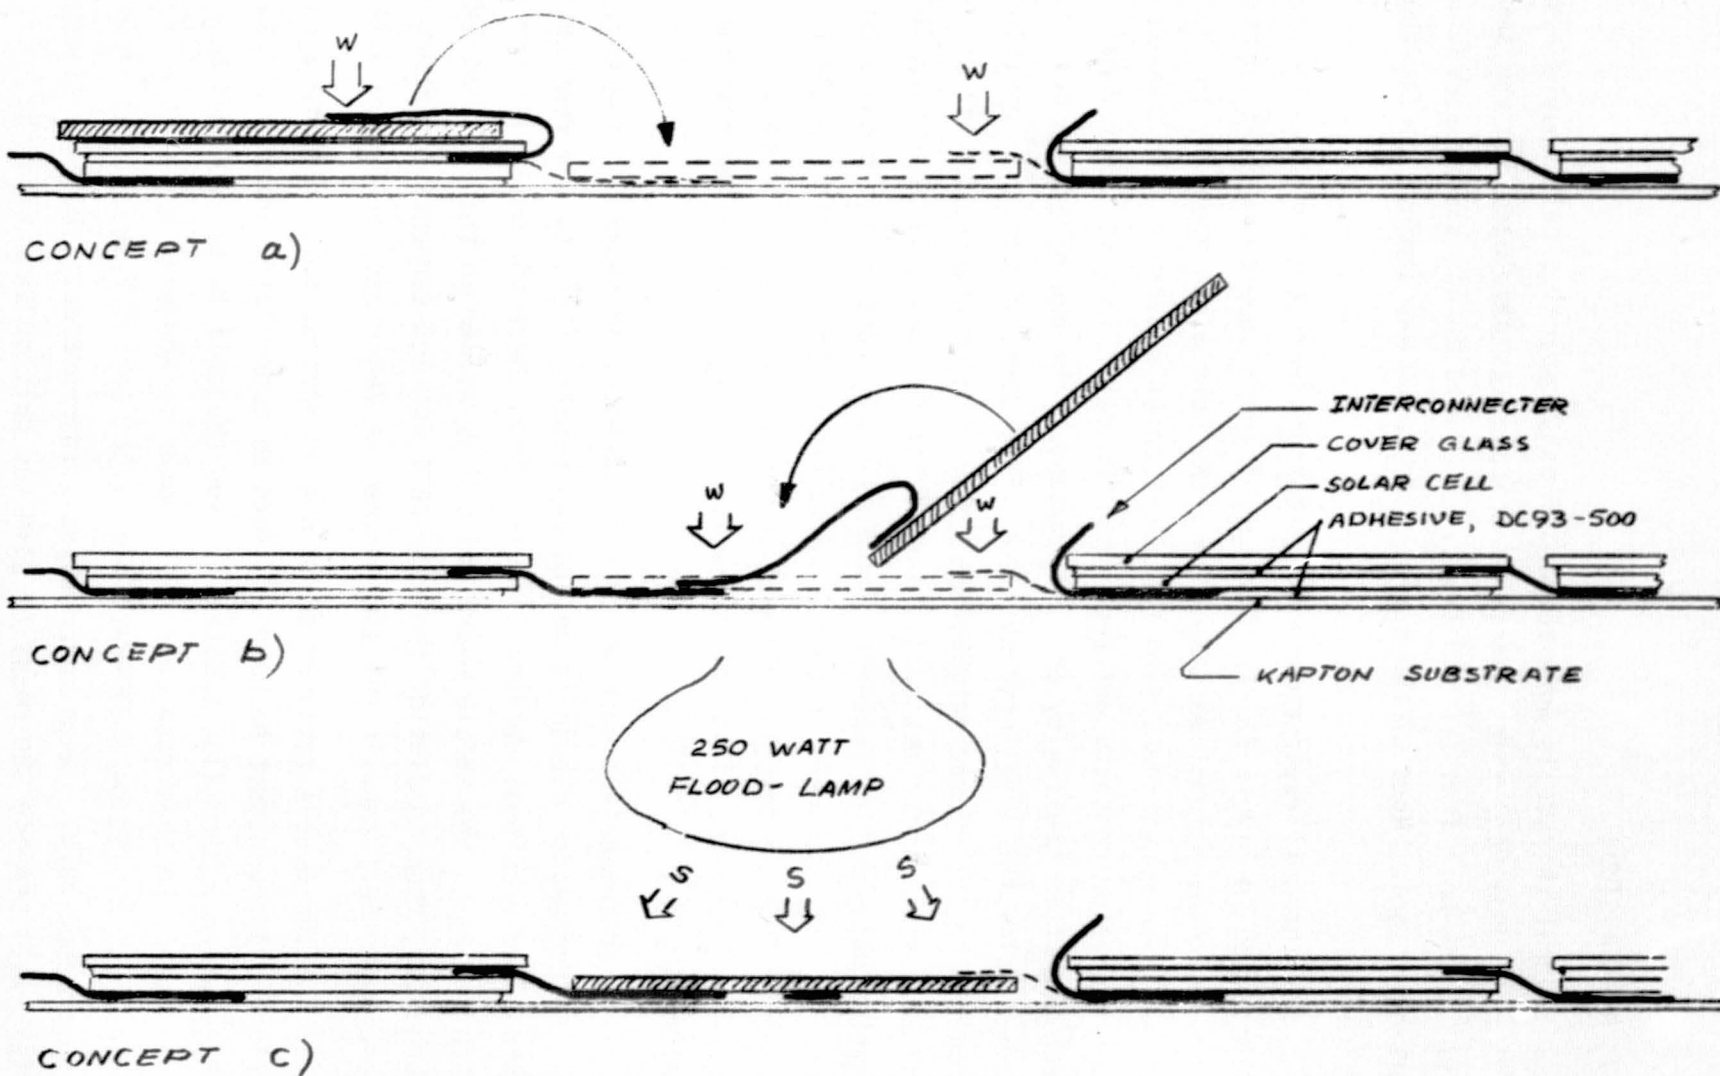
Three Options of Cell Replacement, Employing Welding and Reflow Soldering
